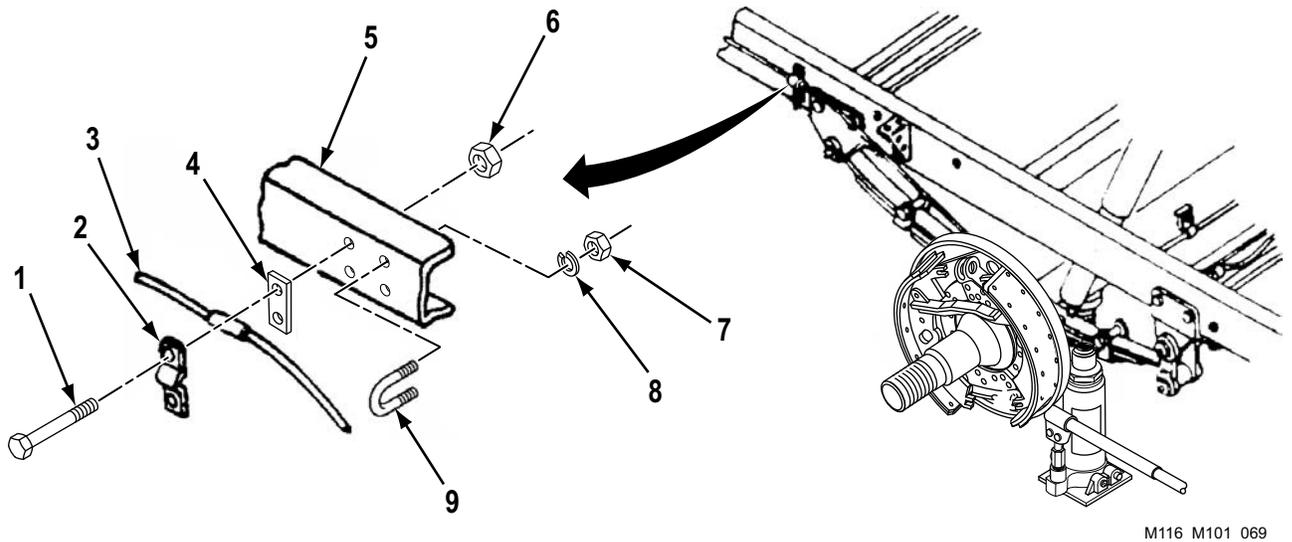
Brake Cable Assembly Removal From Wheel Brake.
